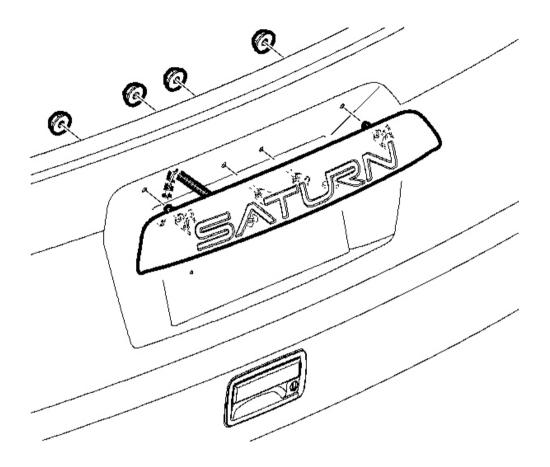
View Of License Lamp Bezel Courtesy of GENERAL MOTORS CORP.
